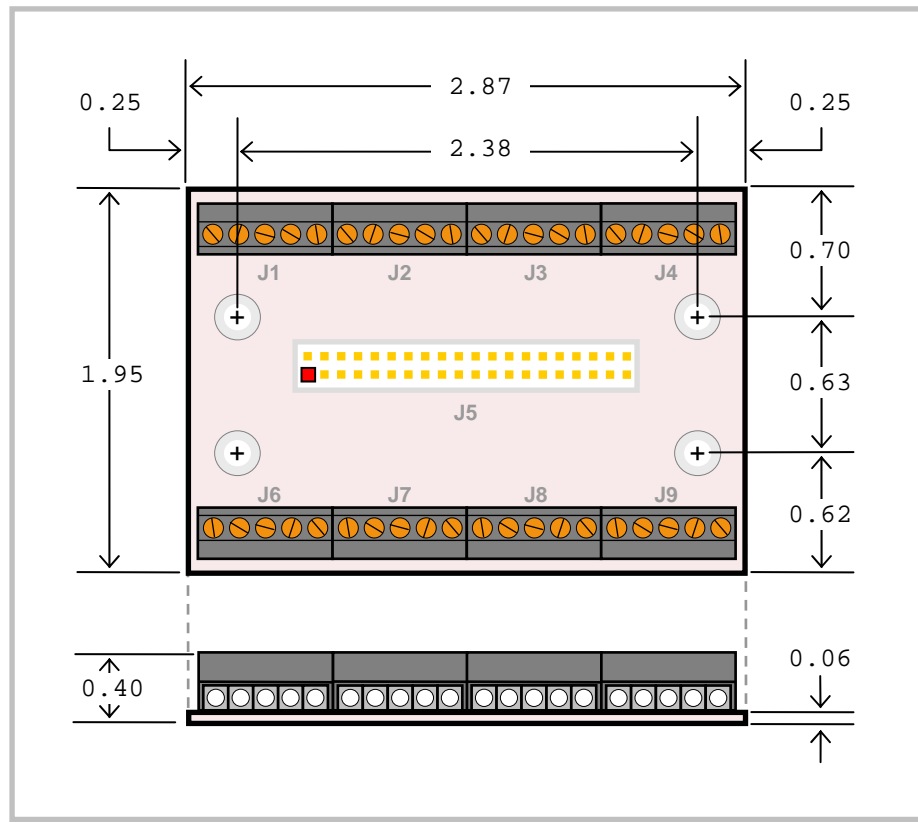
VL-CBR-4004 Dimensions and Mounting Holes
